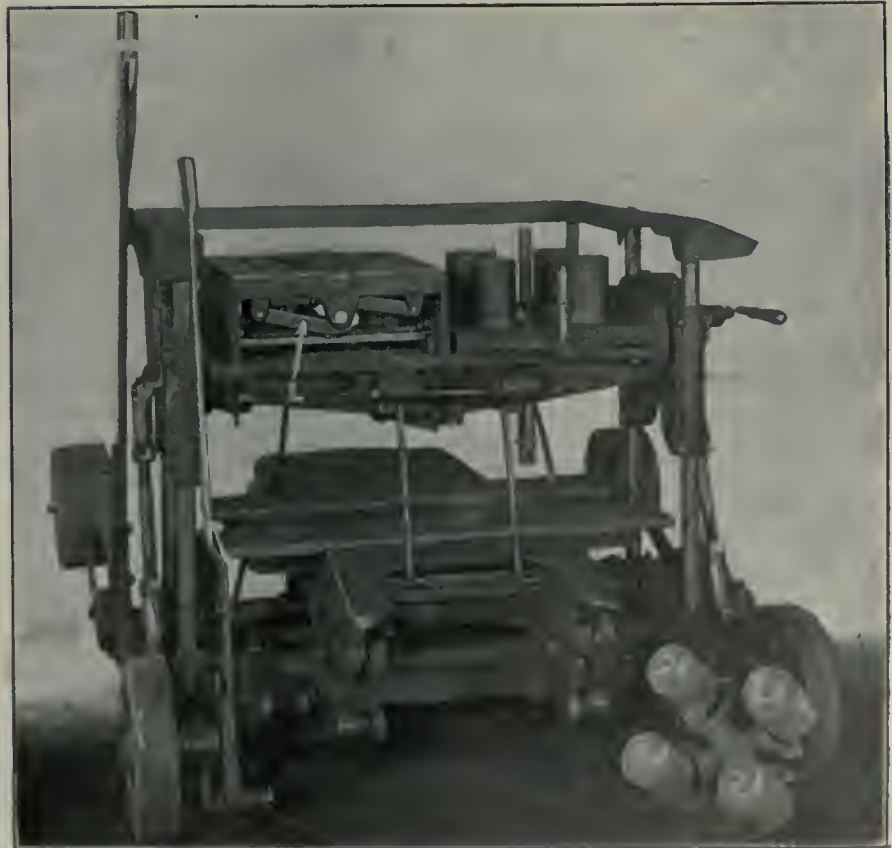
ARCADE PISTON MOLDING MACHINE.
